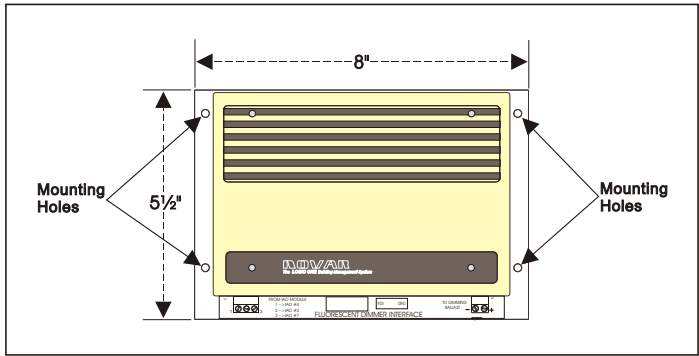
Mounting holes for the Fluorescent Dimmer Interface
